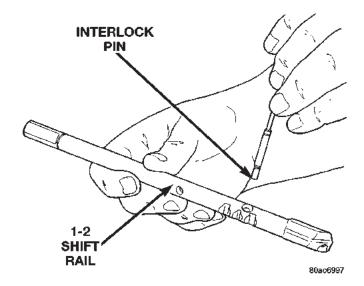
Remove 1-2 Shift Rail Interlock Pin
